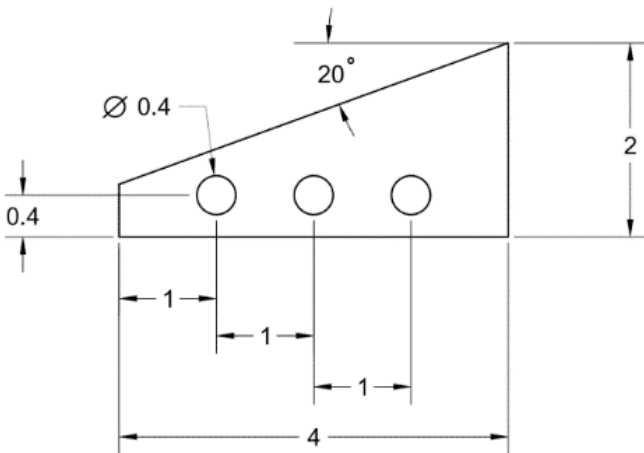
A schematic view of the perforated vortex generator and the dimensions used in this study (longitudinal dimensions, cm)
